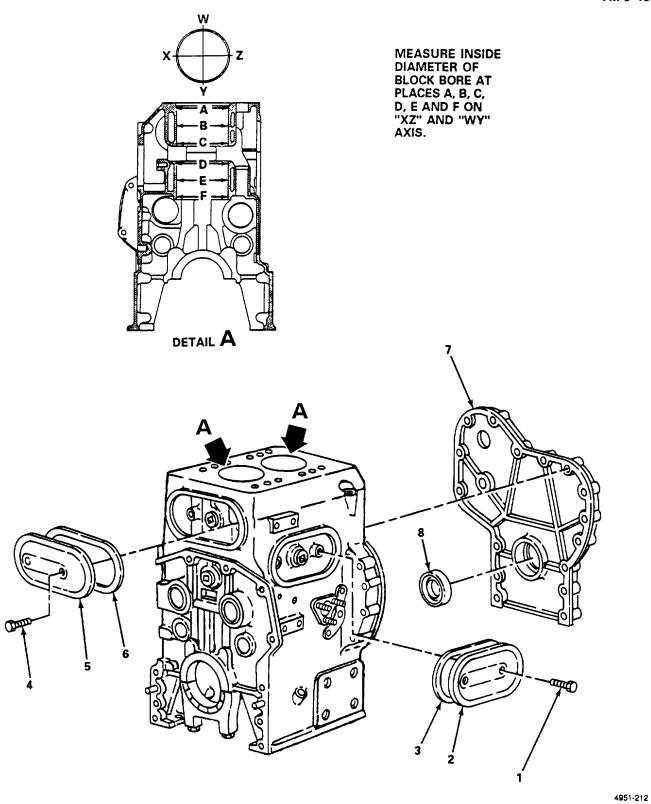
Cylinder Block and Front Cover Assembly, Replace.
